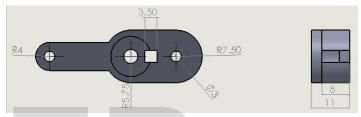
3D design of the printed PEM base which was printed with a 3D FLsun priter model FLsun T plus. Meassurements in millimeters
